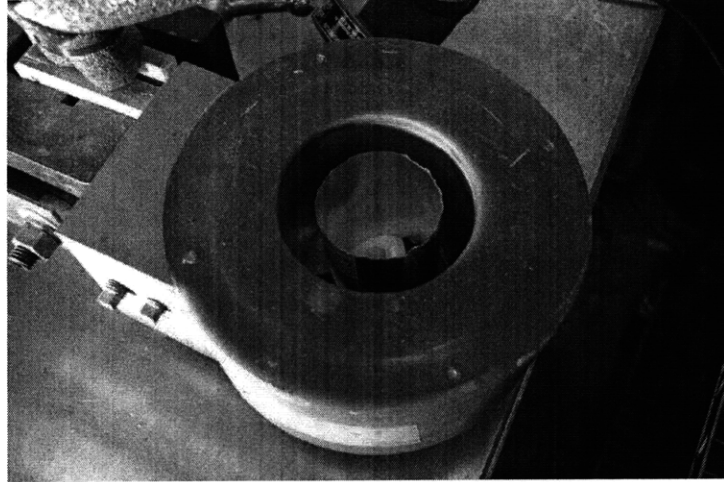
Top-view of the MAGNEFORM coil used at MIT at an early stage (without modifications) and an Aluminum can as the workpiece specimen.
